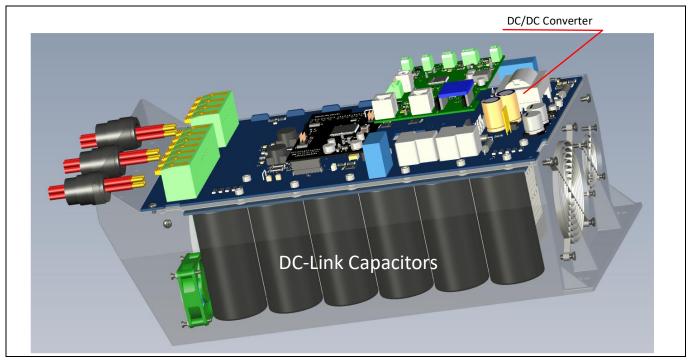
Inverter Construction Scheme (top-right view), Housing removed
